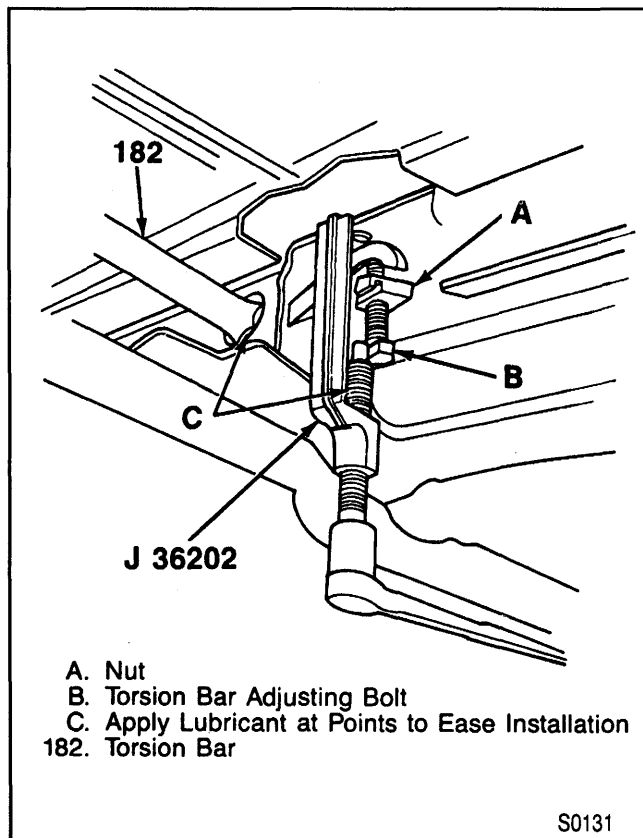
Removing or Installing the Torsion Bar Adjusting Bolt
